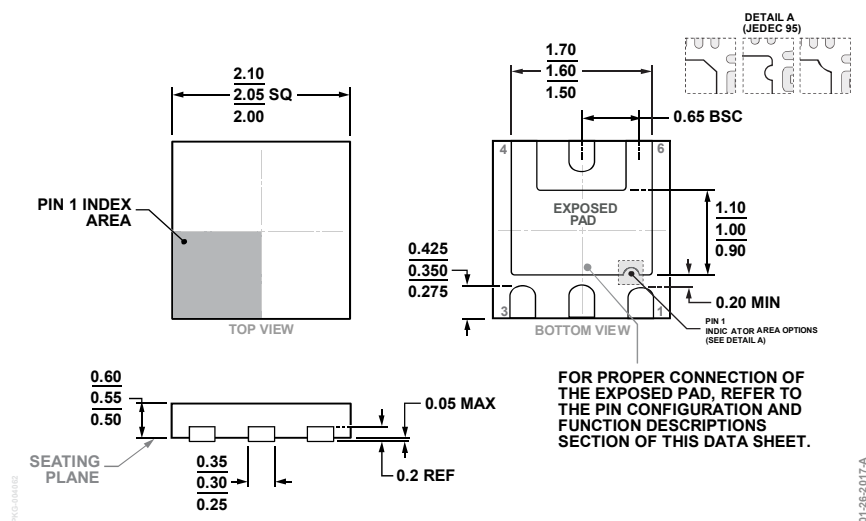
6-Lead Lead Frame Chip Scale Package [LFCSP]
